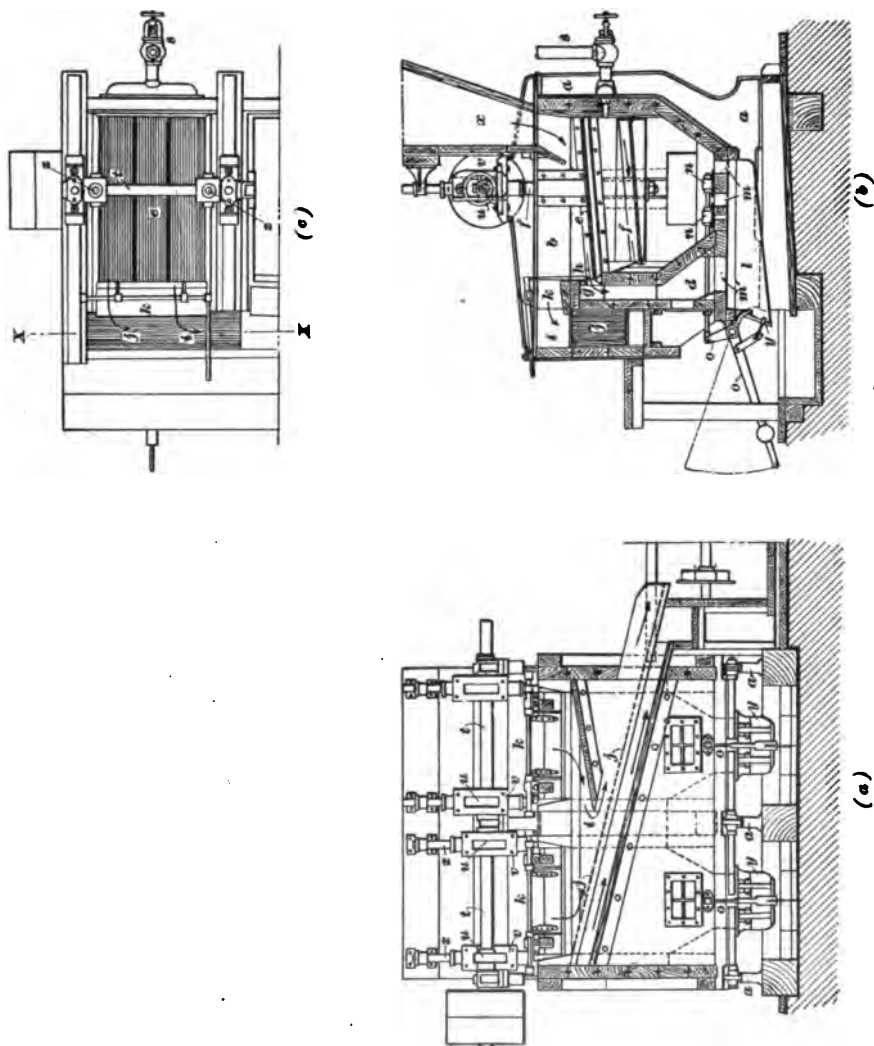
STUTZ IMPROVED COAL-JIGGING AND WASHING MACHINE
